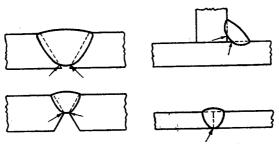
Roots of Weld (Arrow-head indicates the root of weld)
